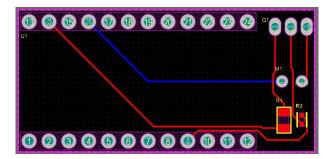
Board containing MCU, Communication Module and Motor Driver Circuit
